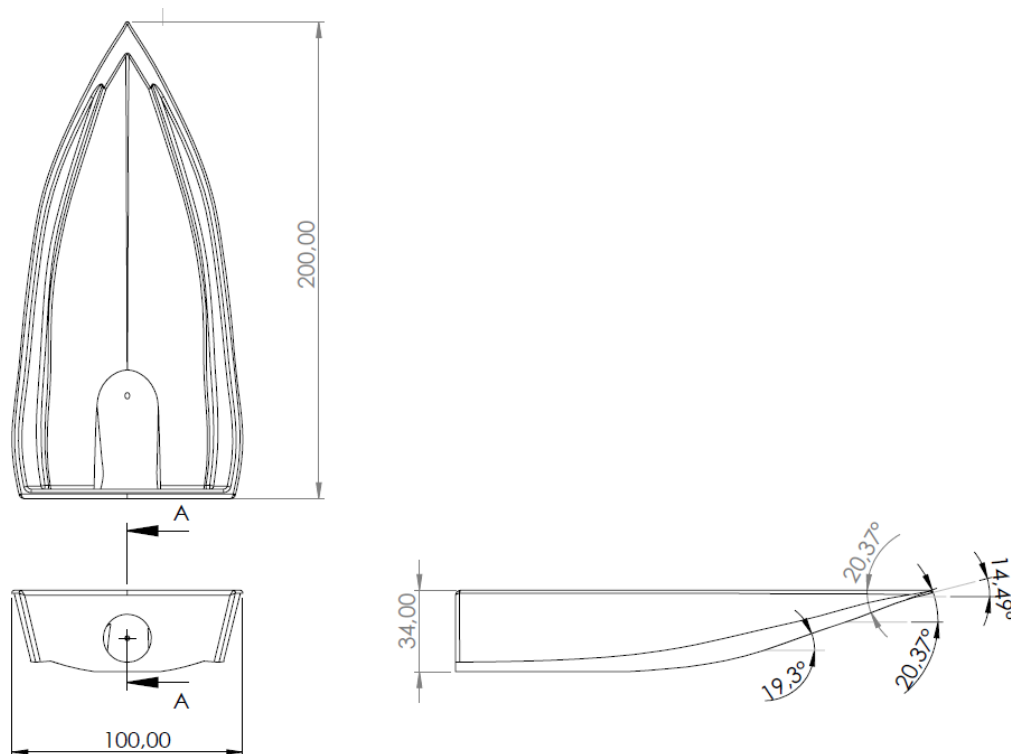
CAD design (with dimensions in mm) of the first boat prototype.
